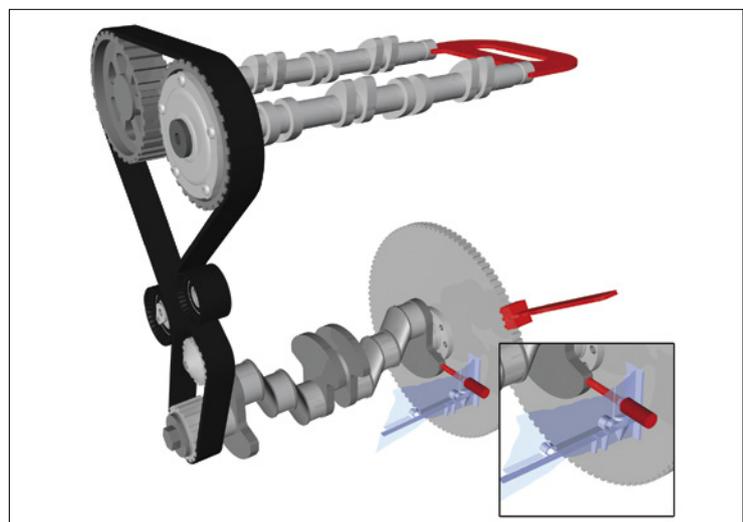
Timing belt drive with camshaft locking plate (red) in place, camshaft timing pin (red) and flywheel locking tool (red)
